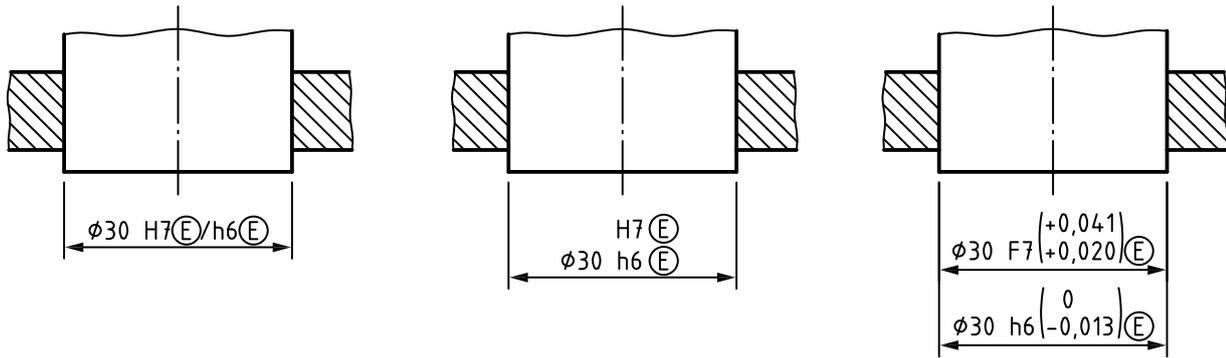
Examples of assembly drawing with ISO code system tolerancing of two features in a fit
